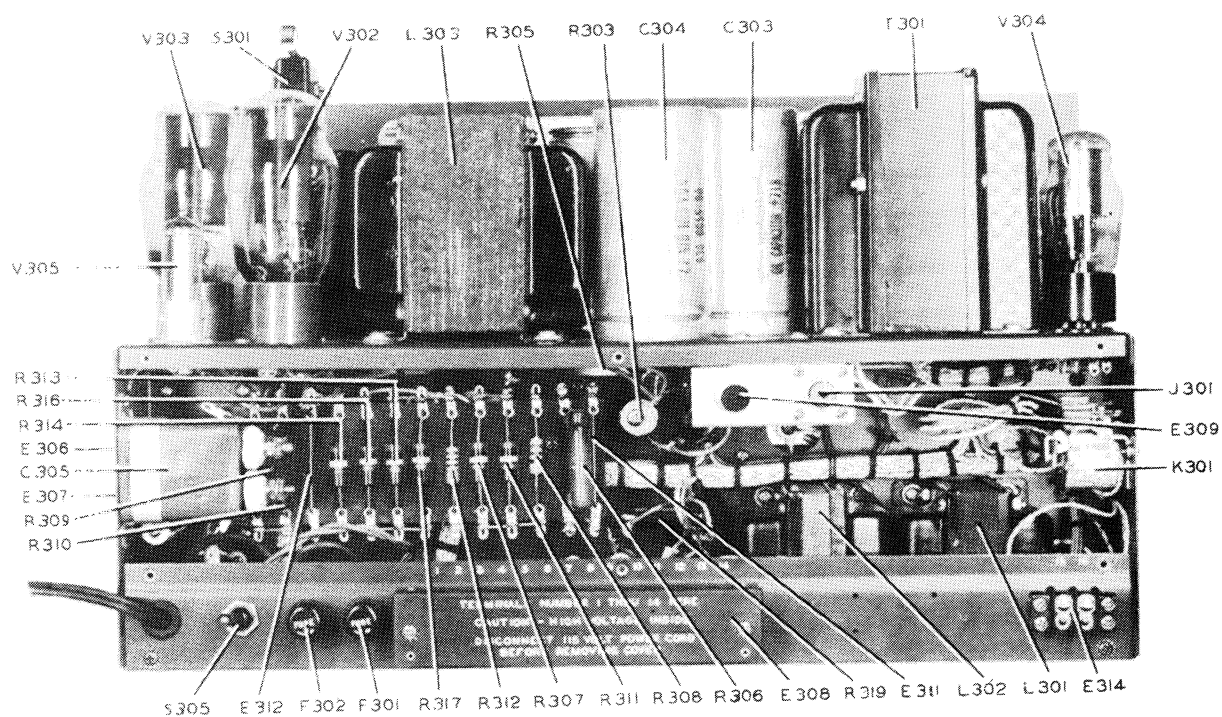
32V-2 PARTS ARRANGEMENT-REAR OPEN
